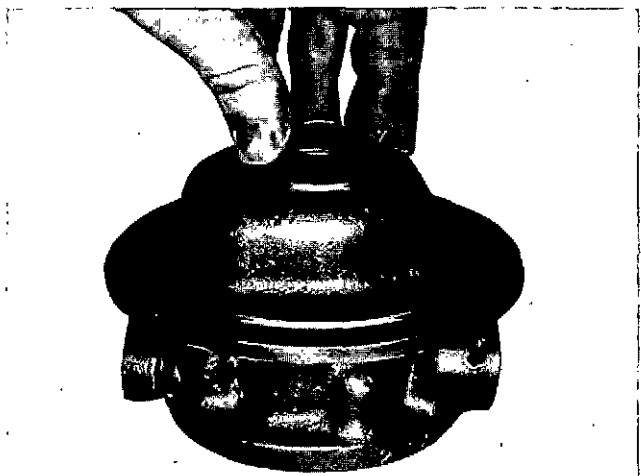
, (TA24). Installing the bearing washer (turbine end)
